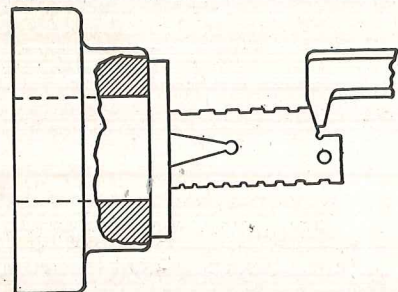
Setting an Acme Threading Tool for Internal Threading
